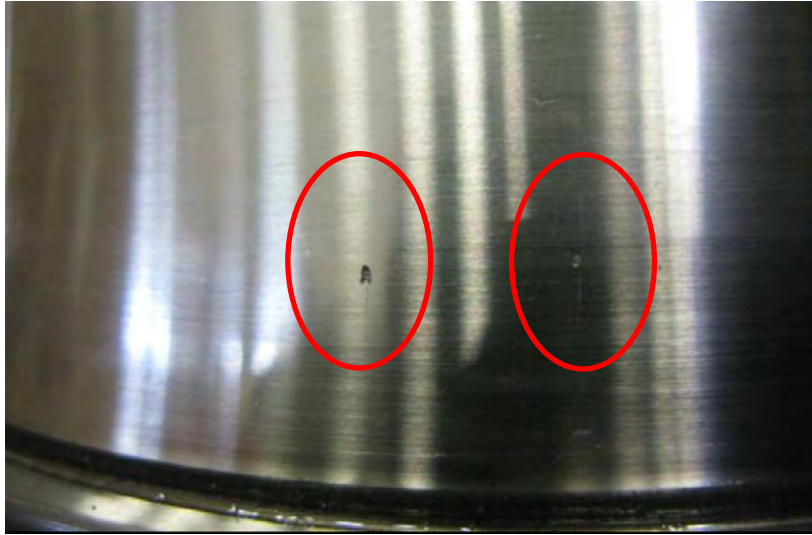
Axial cracks and pitting at the HSS bearing inner race at WTG 01
